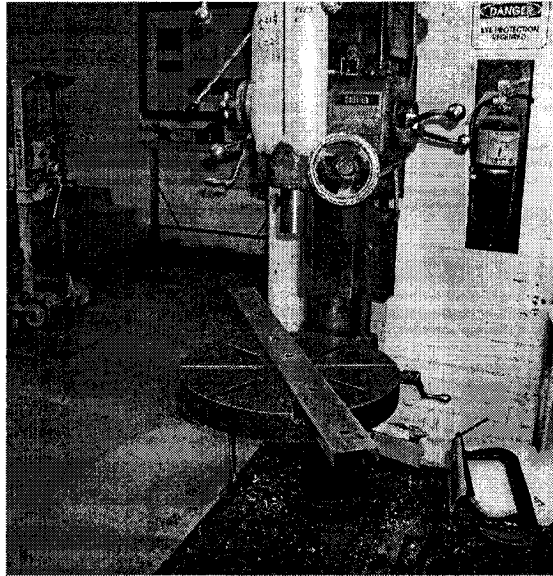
Drilling of 4' (1220 mm) long light gauge steel tracks
